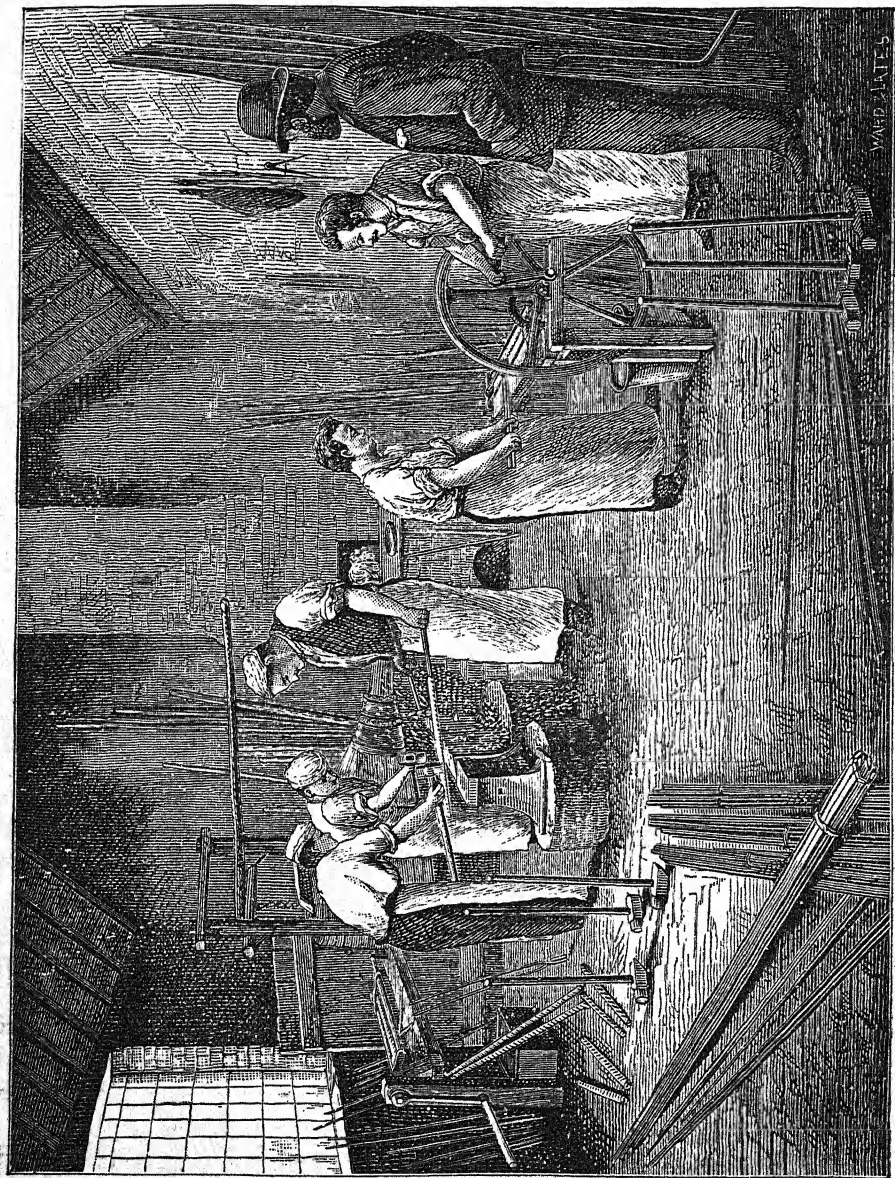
Gun-Barrel Welding at St. Mary's Works.
